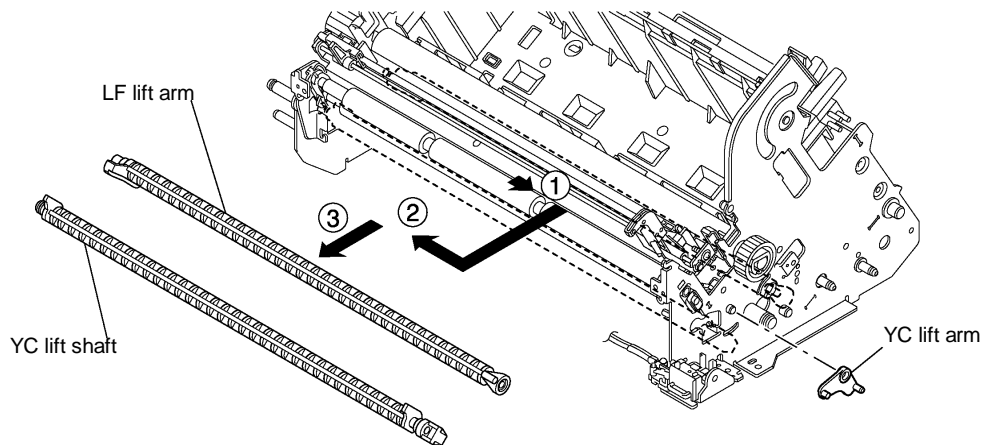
Removing the YC Lift Shaft and LF Change Shaft 2
